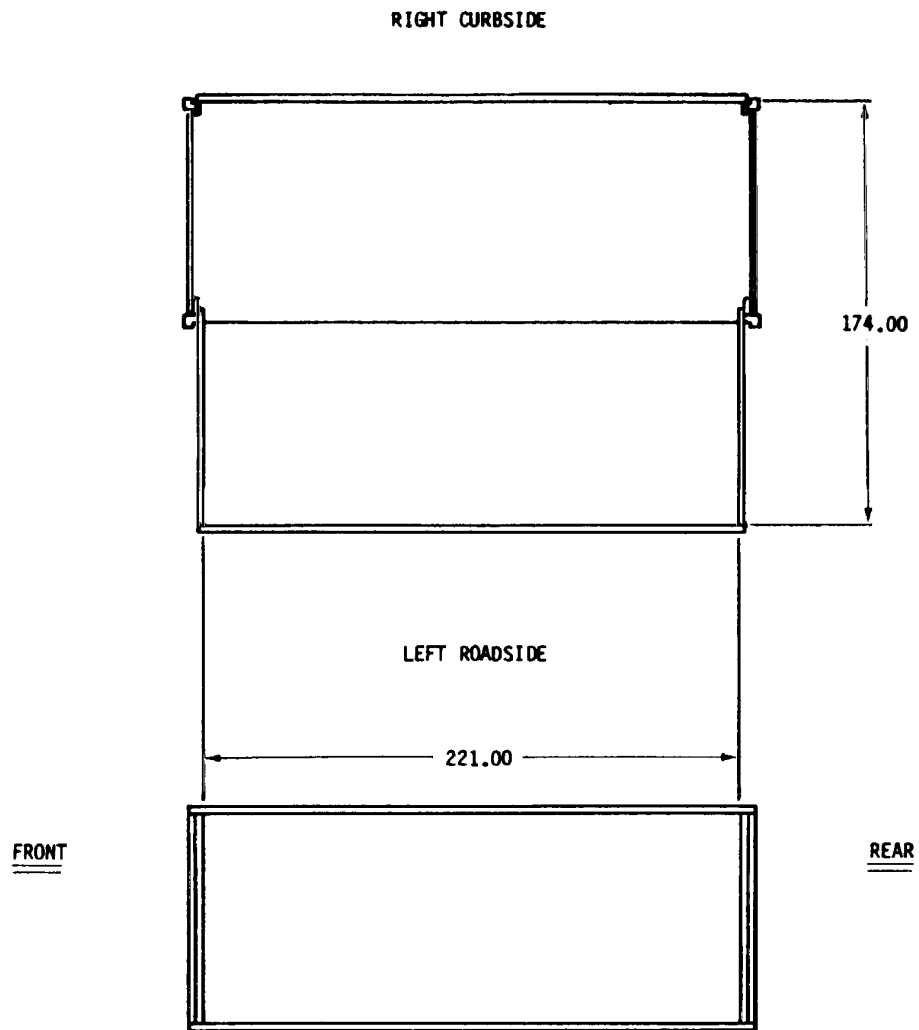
Dimensions for Fabricated Support Angles, Front and Rear, Unit 1, 280.
